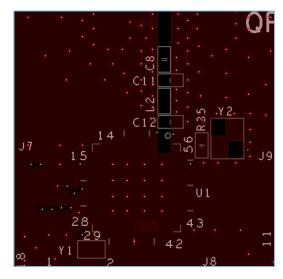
L2 design for 4-layer PCB (QFN56)
